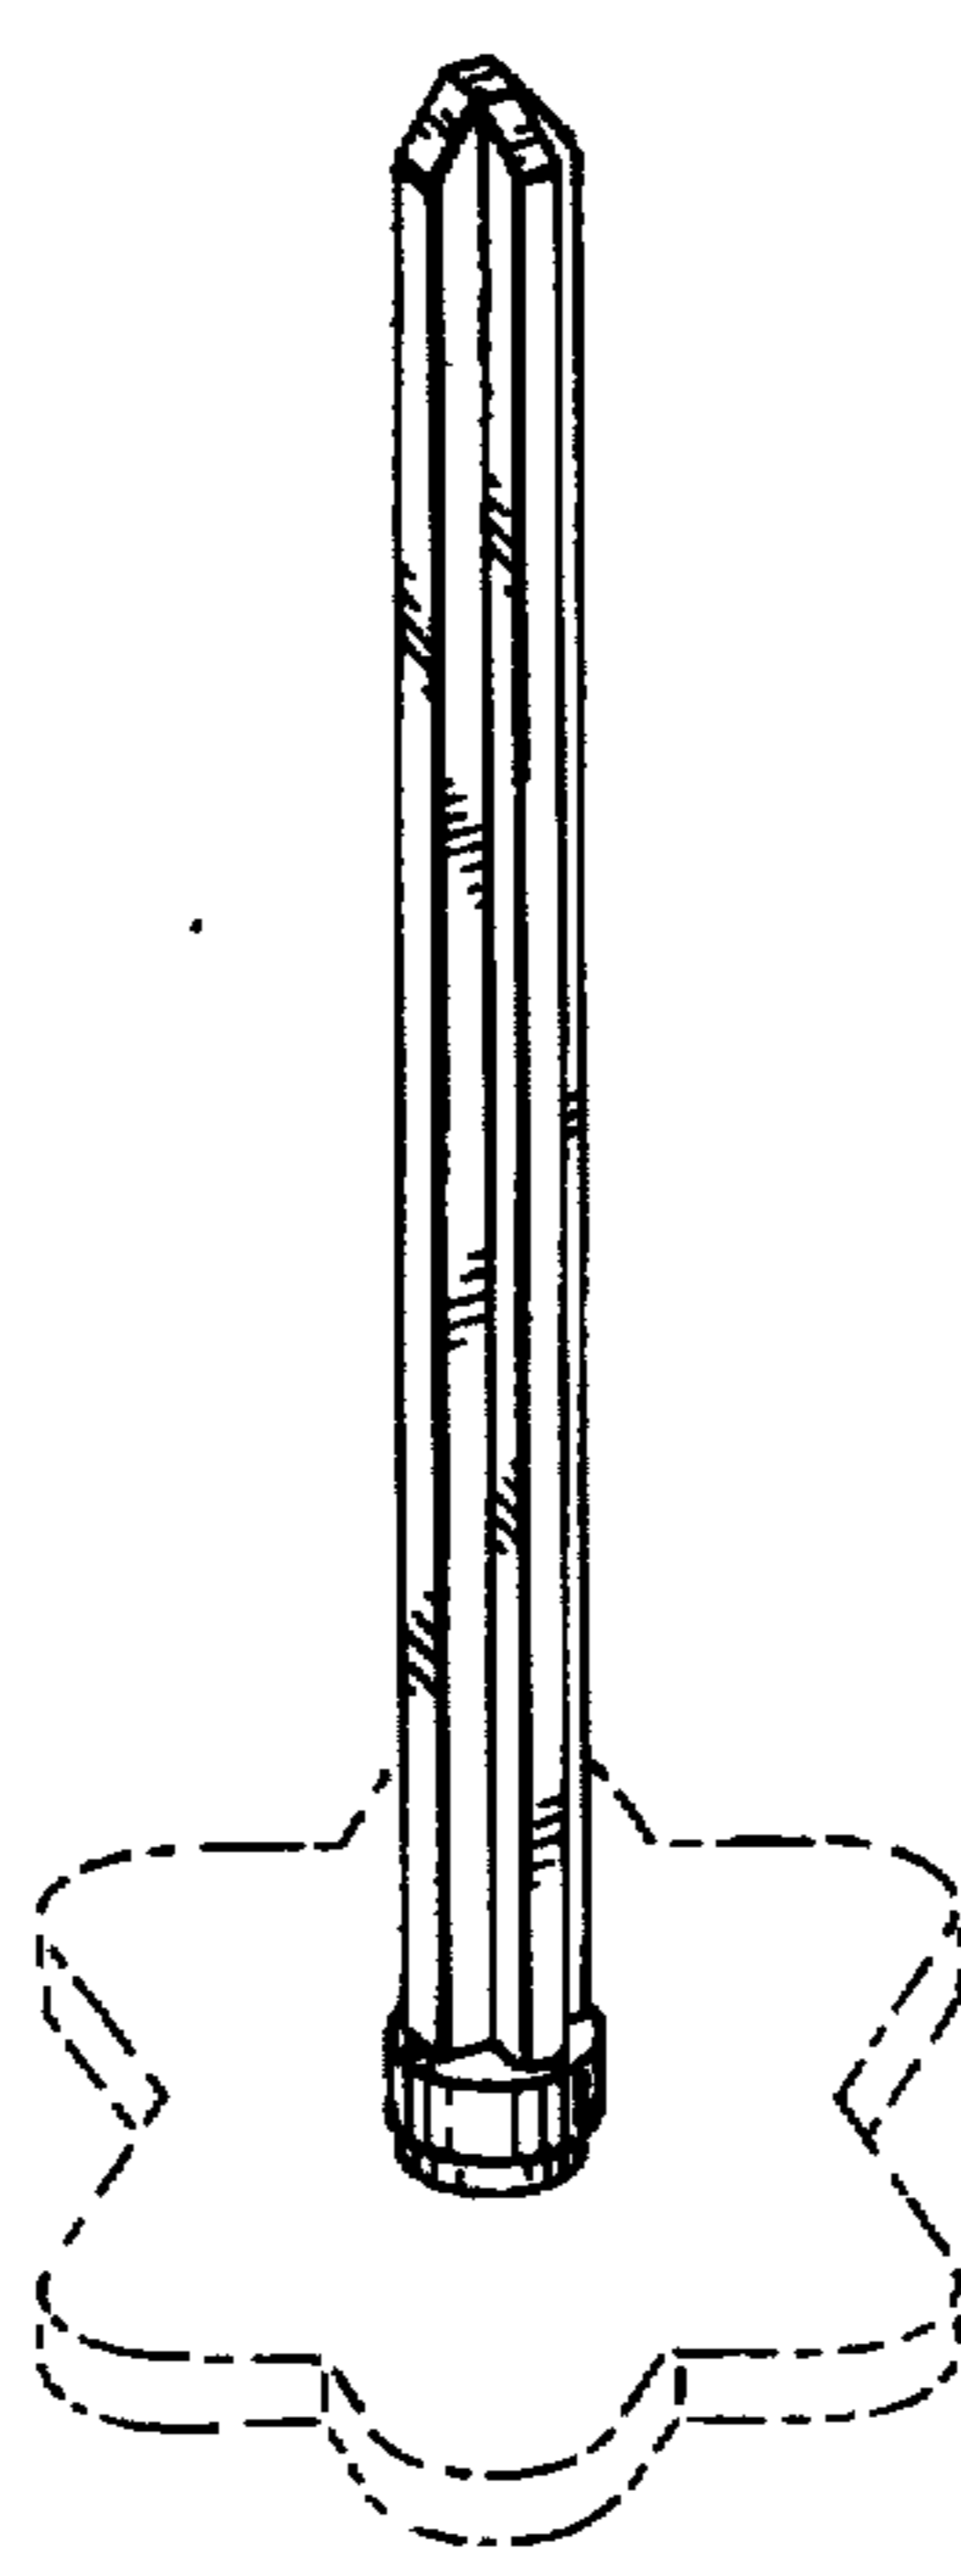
is a perspective view of a can stacker rack showing my new design, with a can stacker base shown in broken lines for purposes of illustration only and forming no part of the claimed design;
